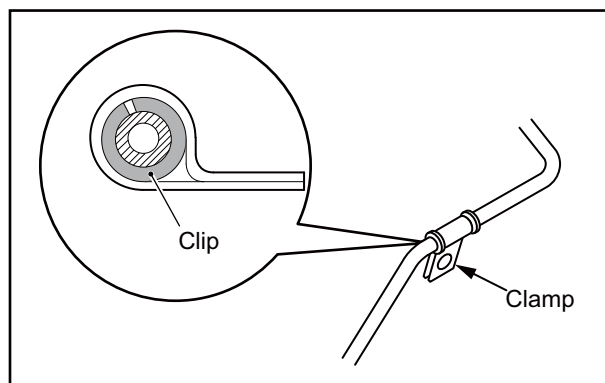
Low Pressure Fuel Pipe, Oil Pipe, and Clip - Inspect and Replace
